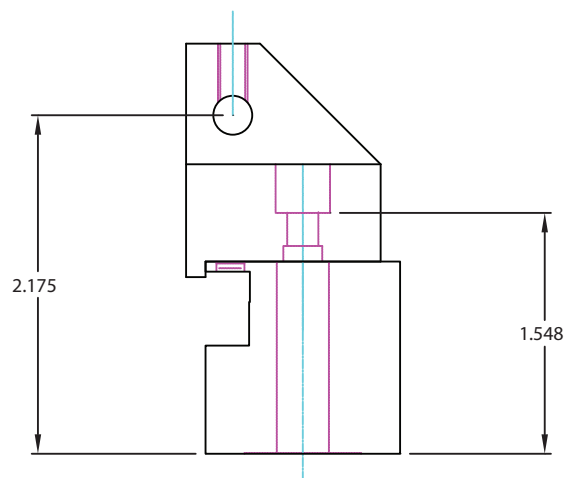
This diagram shows a Radius Cutter Support mounted to the modified tool post, P/N 40180.
